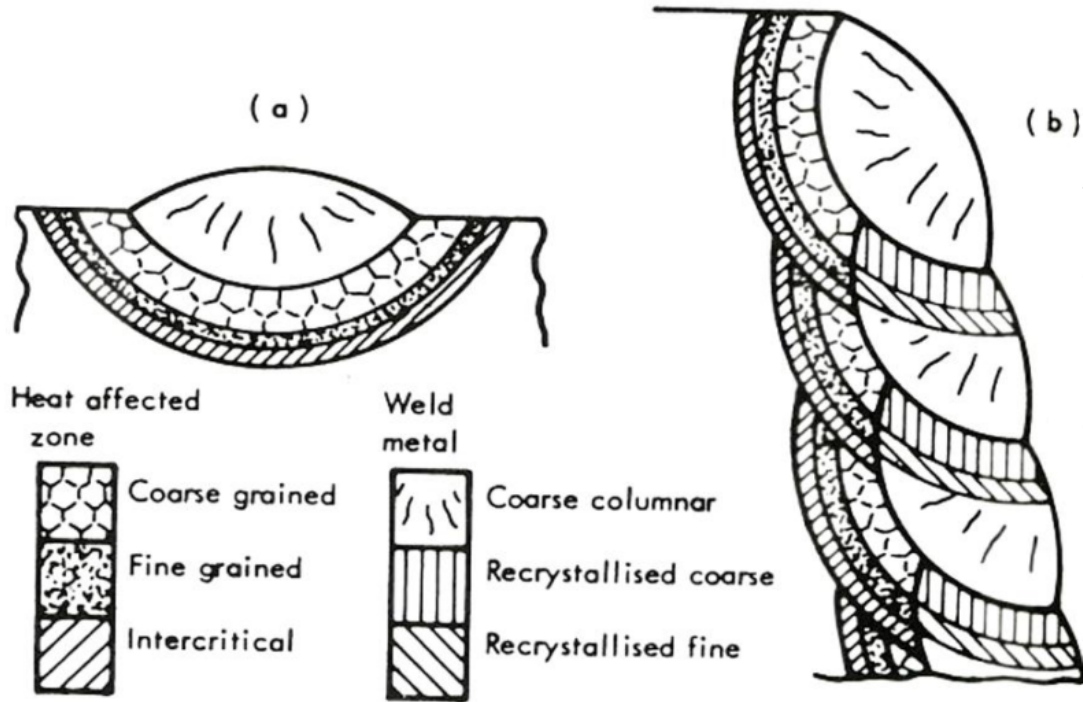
Schematic diagram shows different HAZ and WM formed in a)- Single pass weld b)- Multipass weld (Reprinted with permission) [42].
